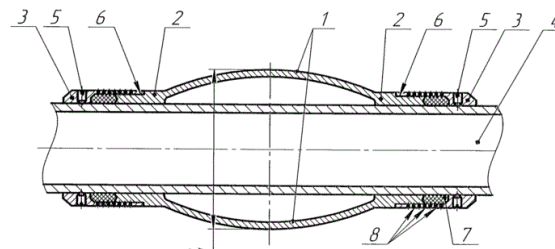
Centralizer swelling: 1 - the metal plates; 2 - the rings for placement; 3 - the lock rings; 4 - the casing; 5 - the locking screws; 6 - the cavities; 7 - the water-swellable polymer; 8 – the holes
